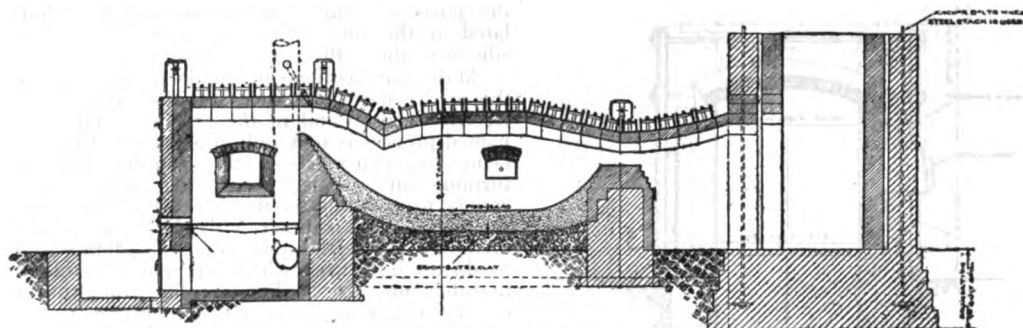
Longitudinal Section of Air Furnace for Malleable Castings
